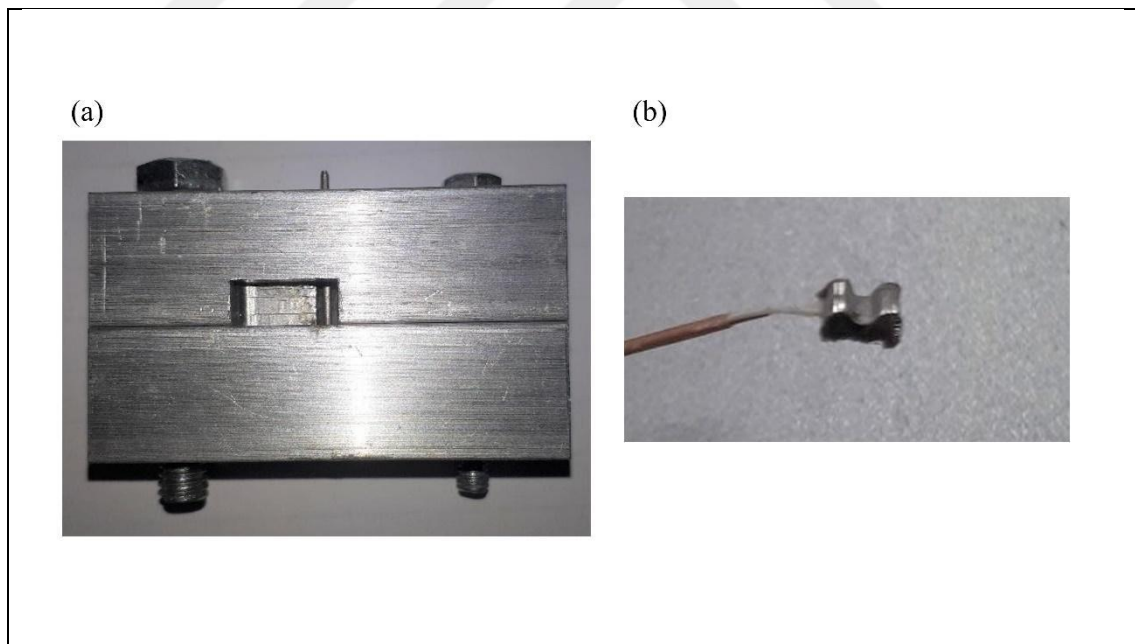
(a) The mold assembly manufactured, and (b) the resulting solder cast at the tip of the thermocouple
